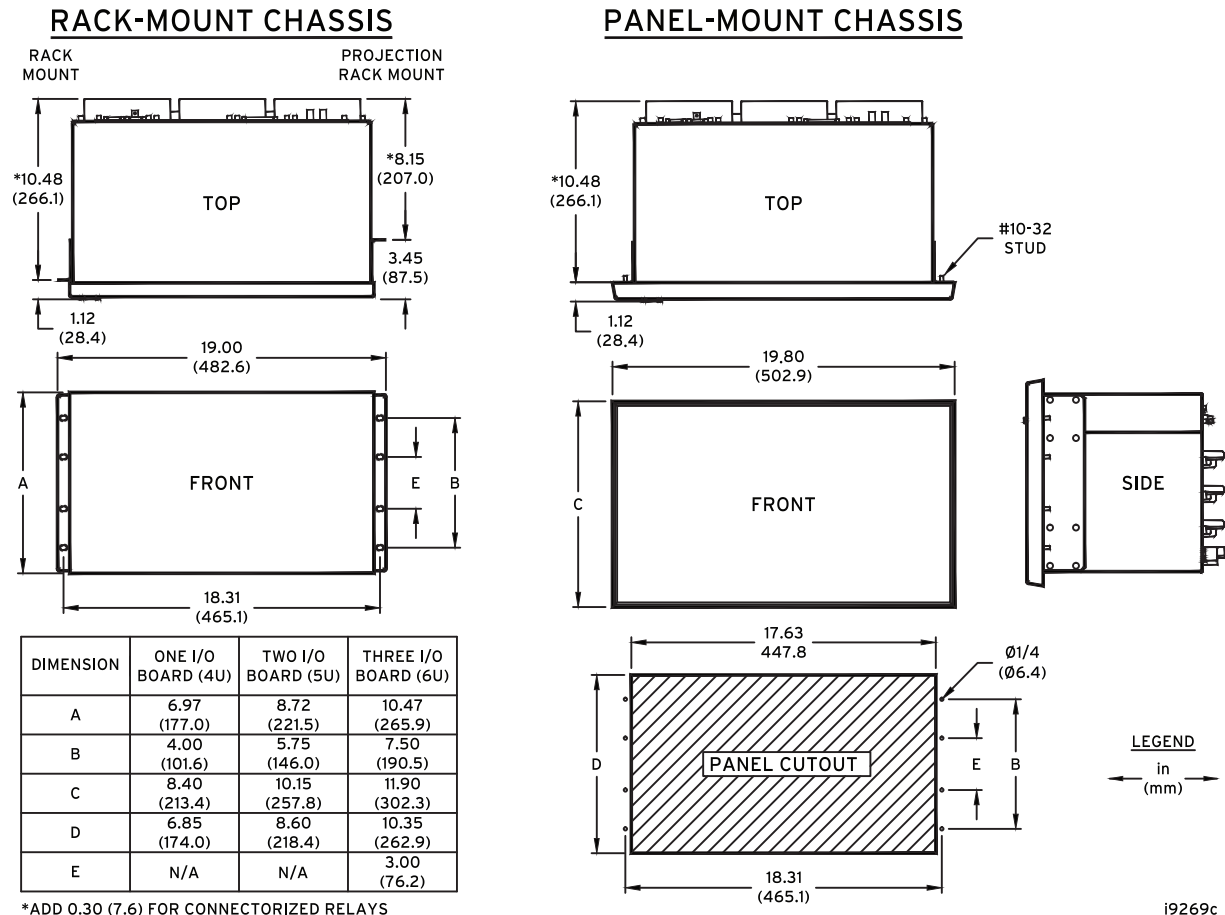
SEL-401 Dimensions for Rack- and Panel-Mount Models
